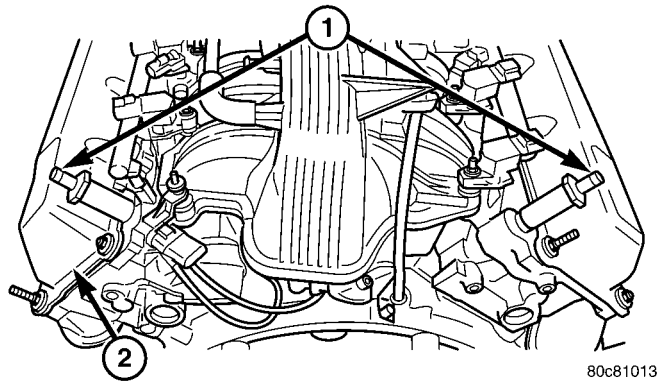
CRANKCASE BREATHERS (2) - 3.7L
